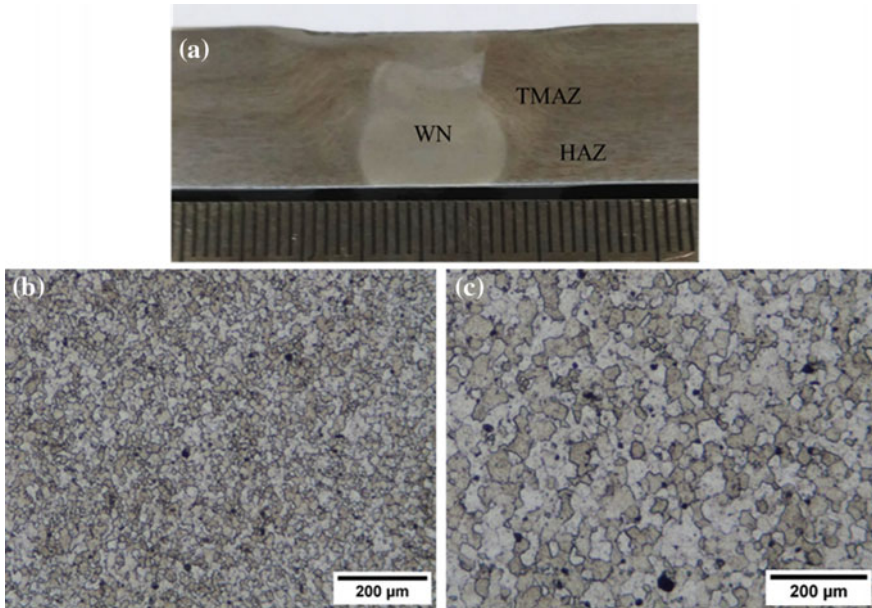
Weld cross-section and weld nugget microstructures: a typical macrostructure, b as-welded, and c CS-treated weld
